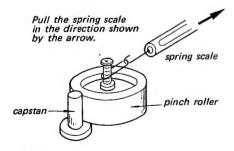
Pinch roller pressure adjustment (2)
